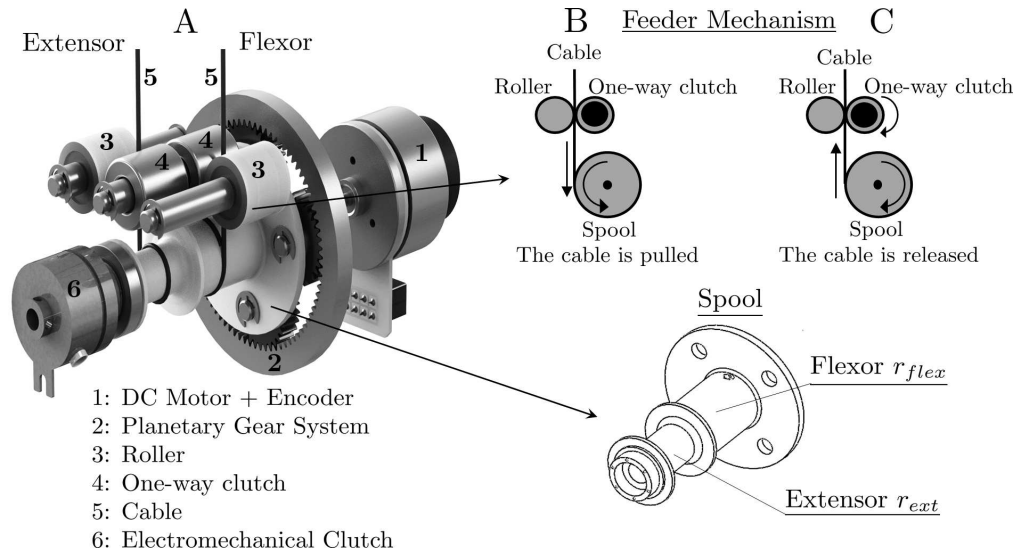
(A): CAD drawing for the actuator and the spool, the larger diameter spool for flexor cable and the smaller diameter spool for extensor (the diameter ratio ≈ 1.66). (B)(C): The feeder mechanism aims to prevent cable derailing; when the cable is released the one-way clutch is free to rotate, otherwise it is locked and the spool drags the cable introducing friction.
